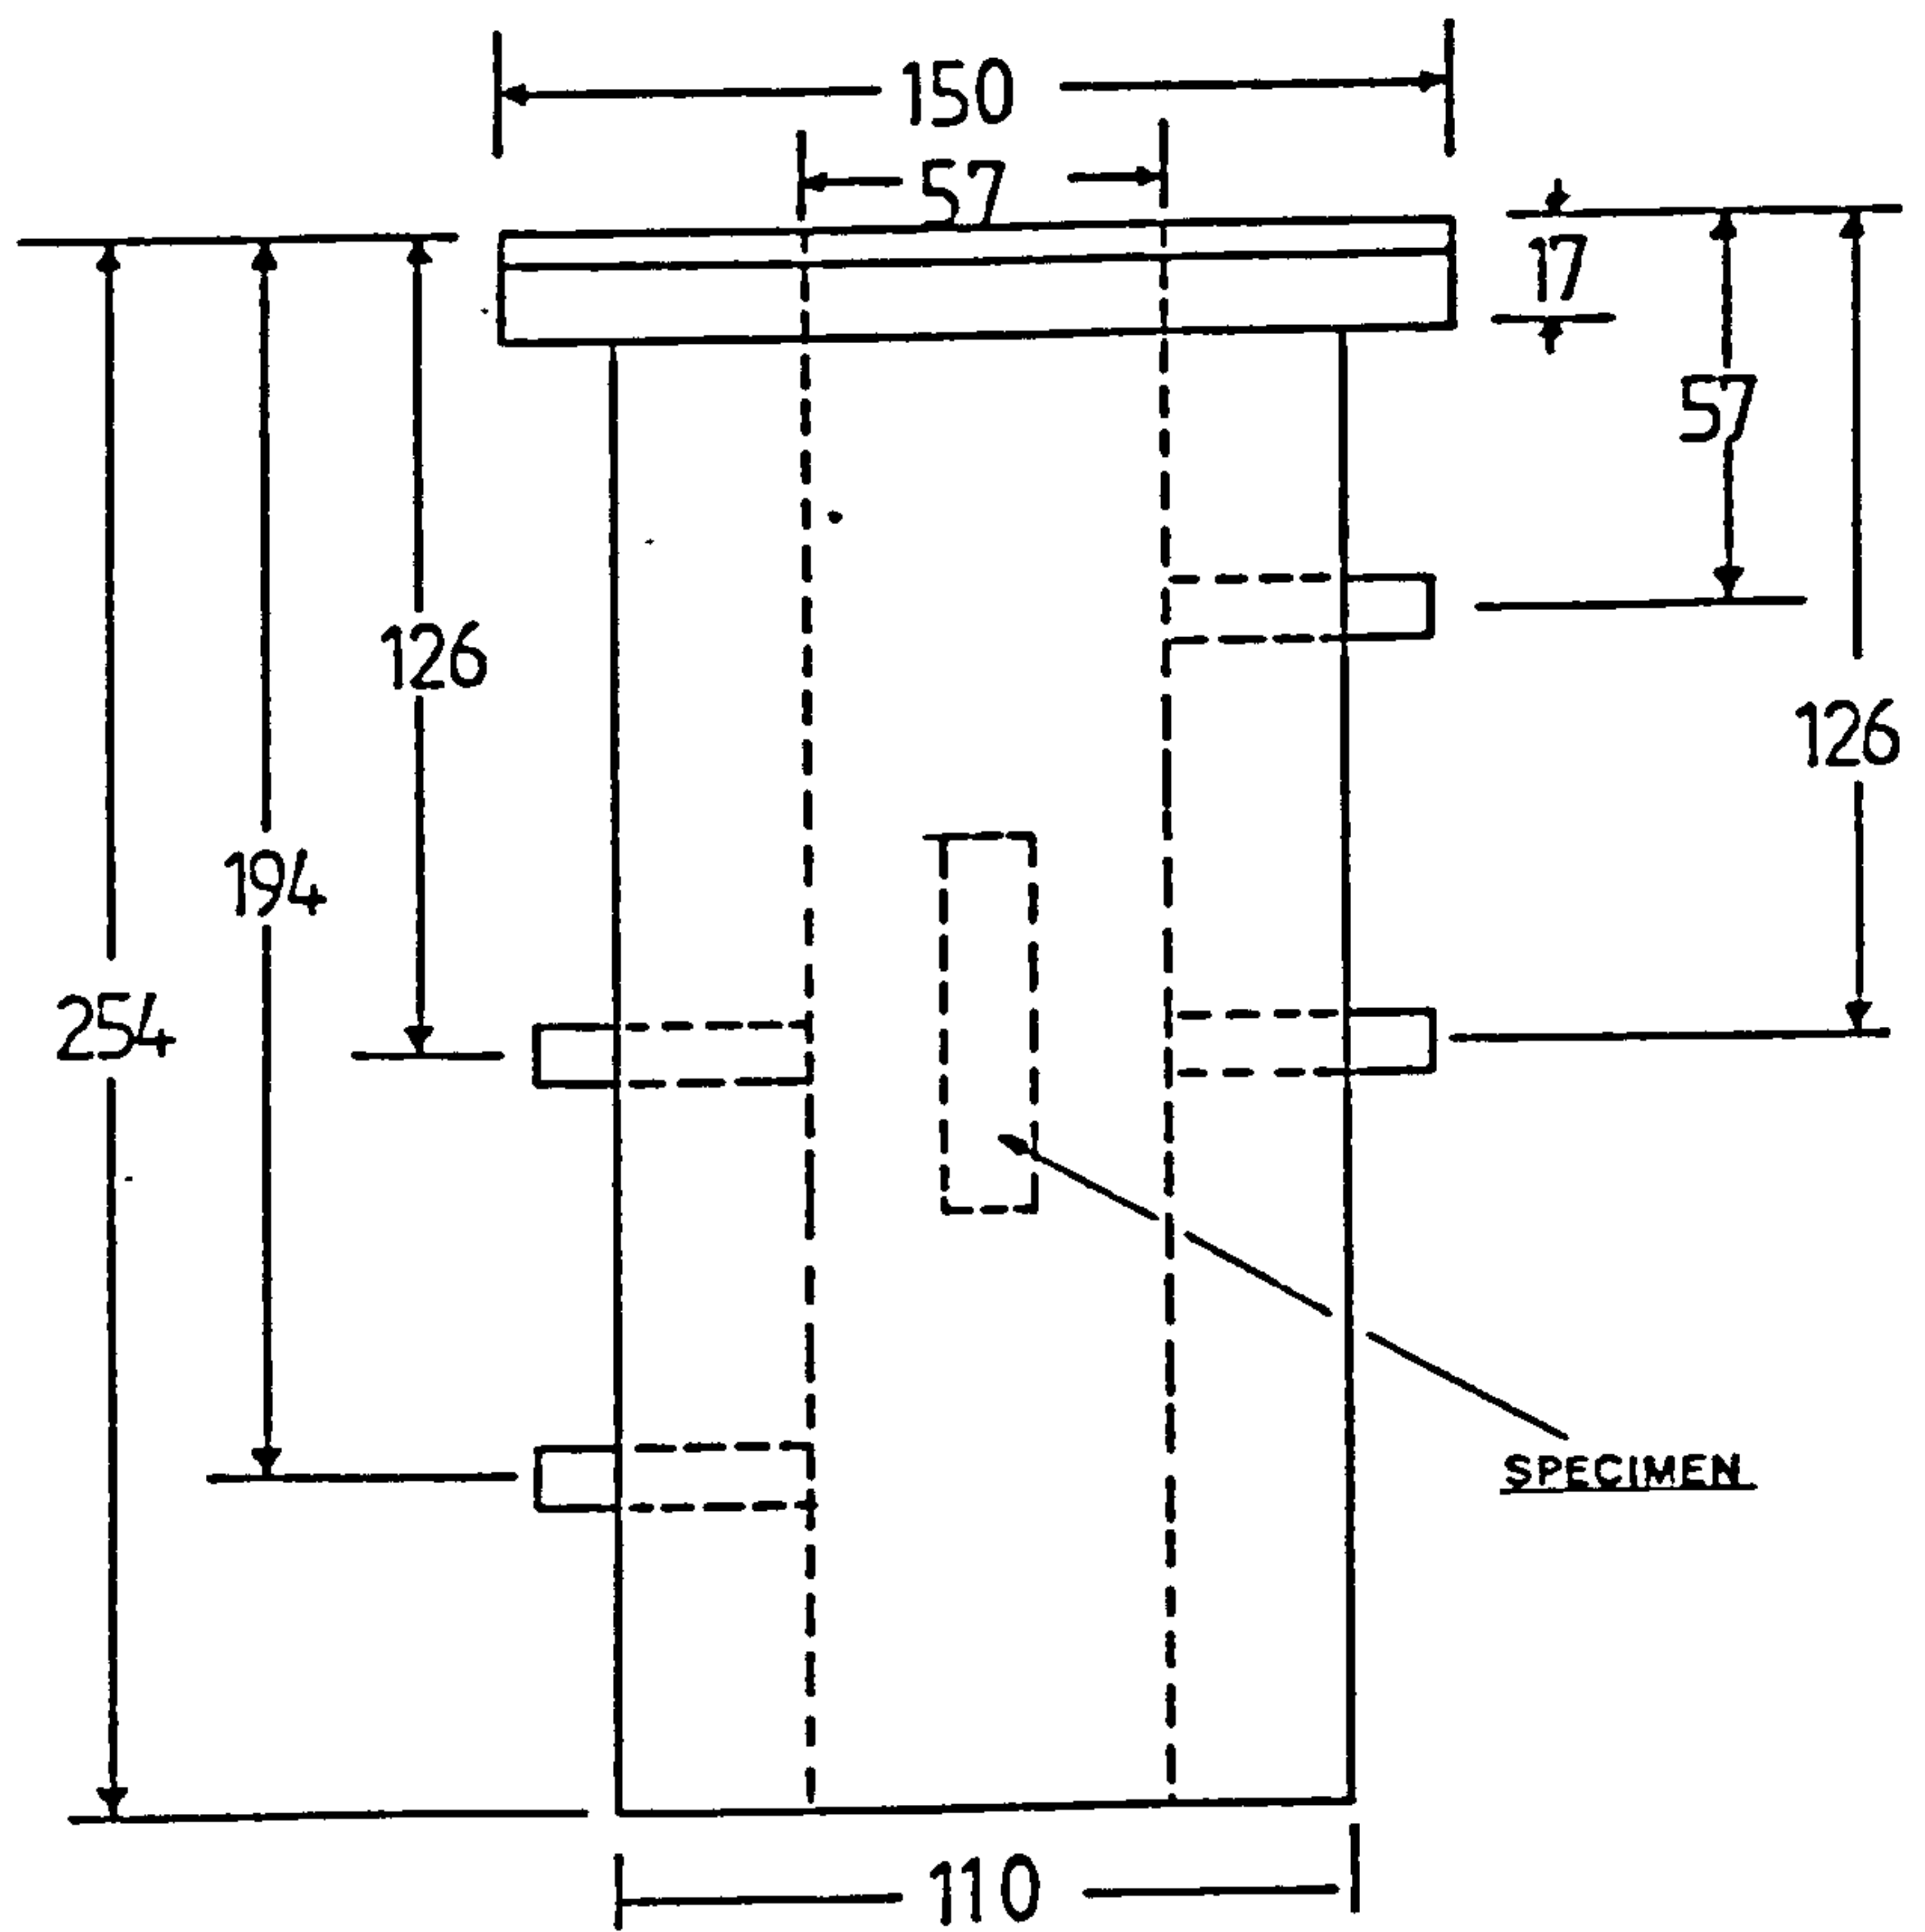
Forced gas cooling chamber. (Dimensions in mm)
